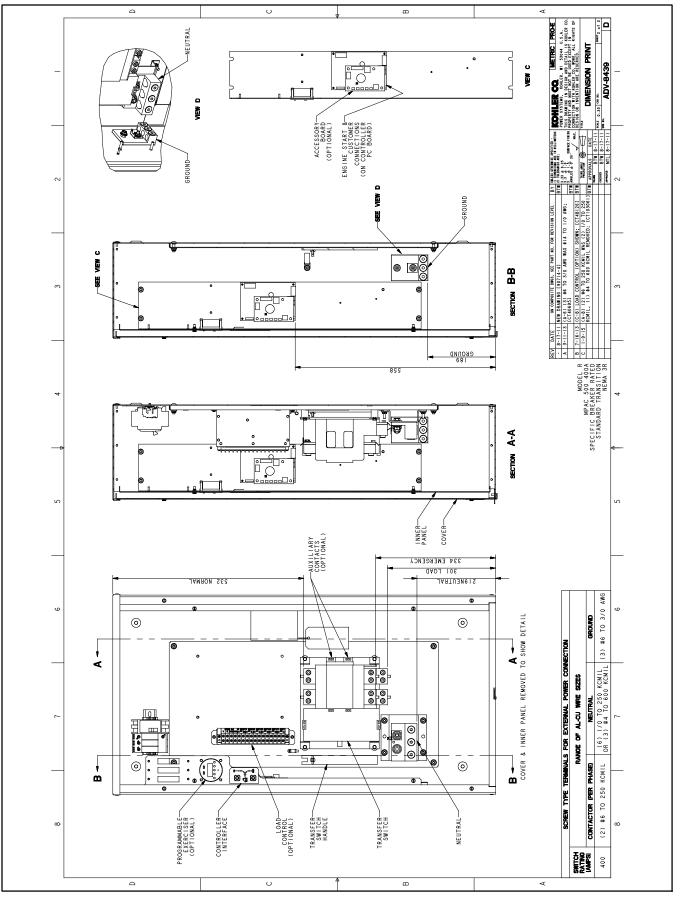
Dimension Drawing, 400 Amp NEMA Type 1 and 3R Enclosure, ADV-8439, Sheet 2 of 2
